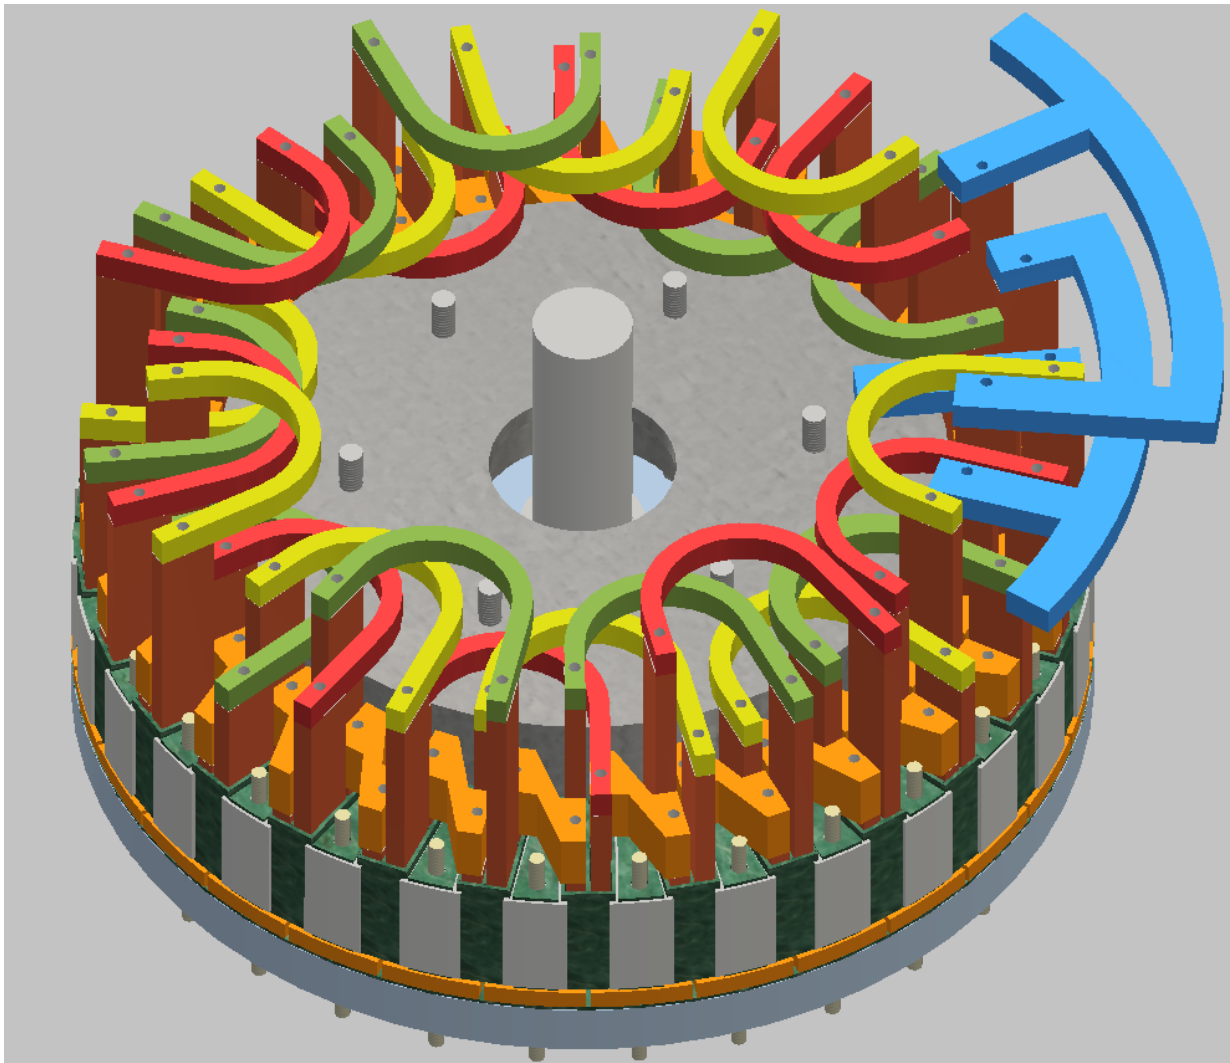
Complete stator assembly, with series connections between coils and three-phase terminals included. Machine dimensions as described in Appendix B.
